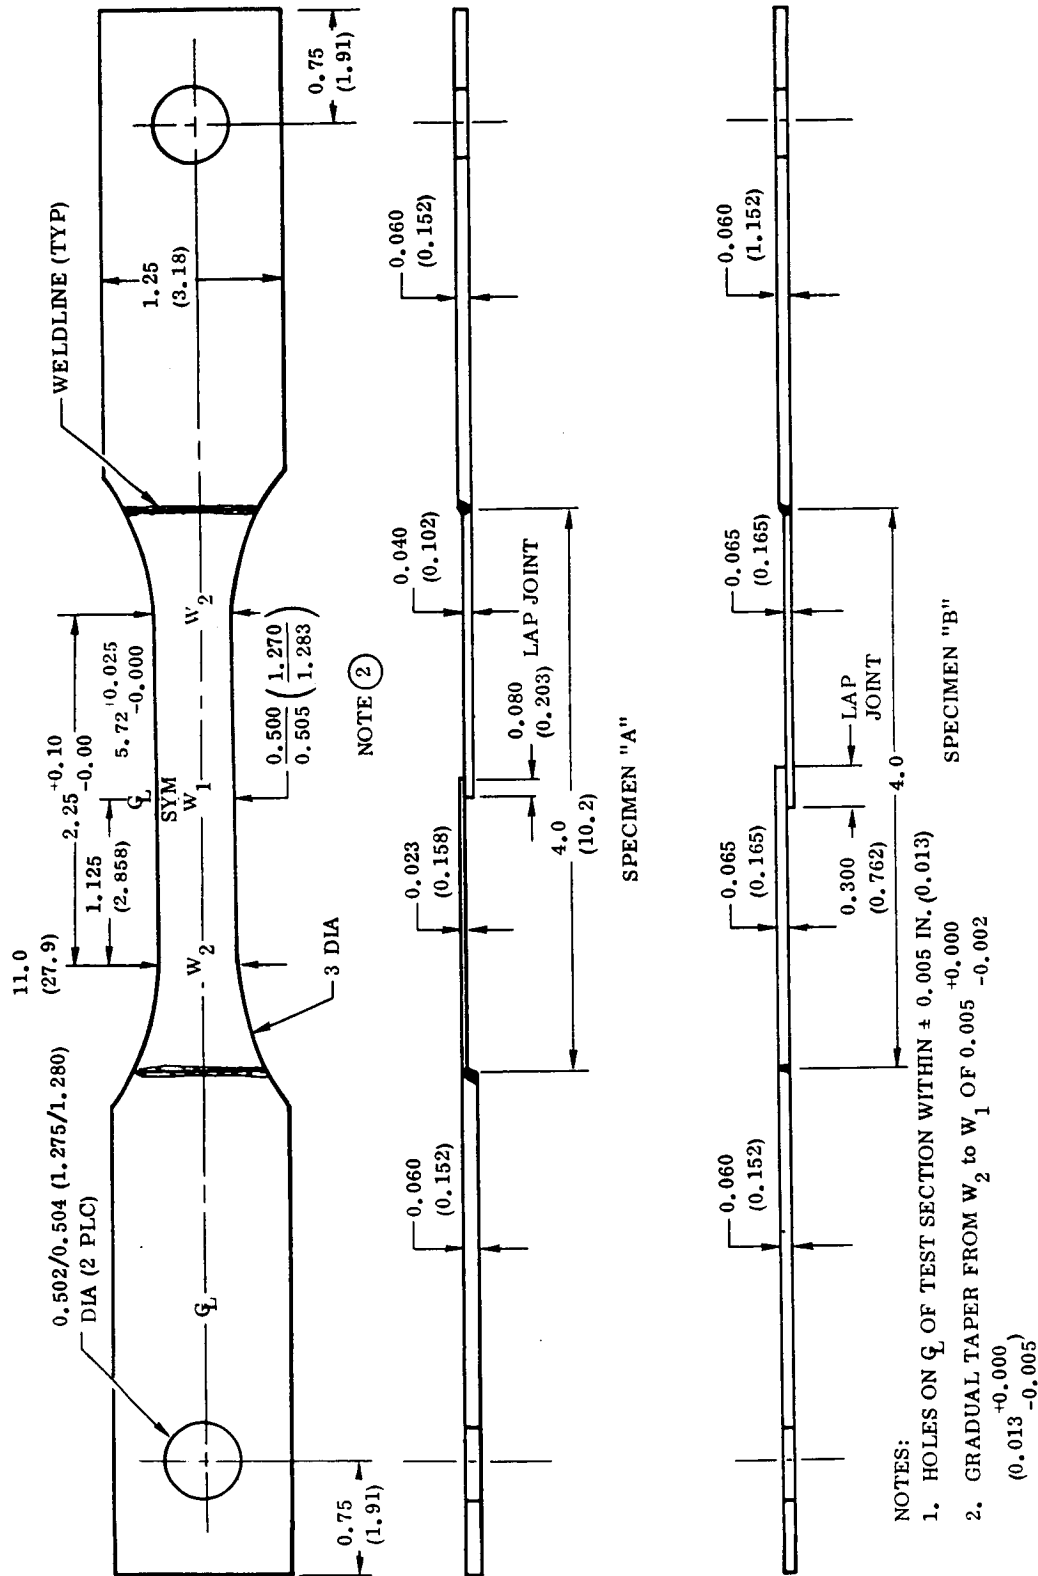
Brazed Flight Simulation Tensile Specimen Details
